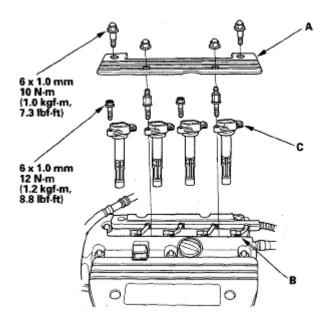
Identifying Ignition Coil Cover And Ignition Coil Connectors With Torque Specifications
